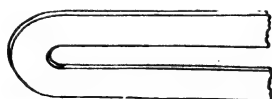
FORMING RIBBON COIL—MACHINE BEND.
